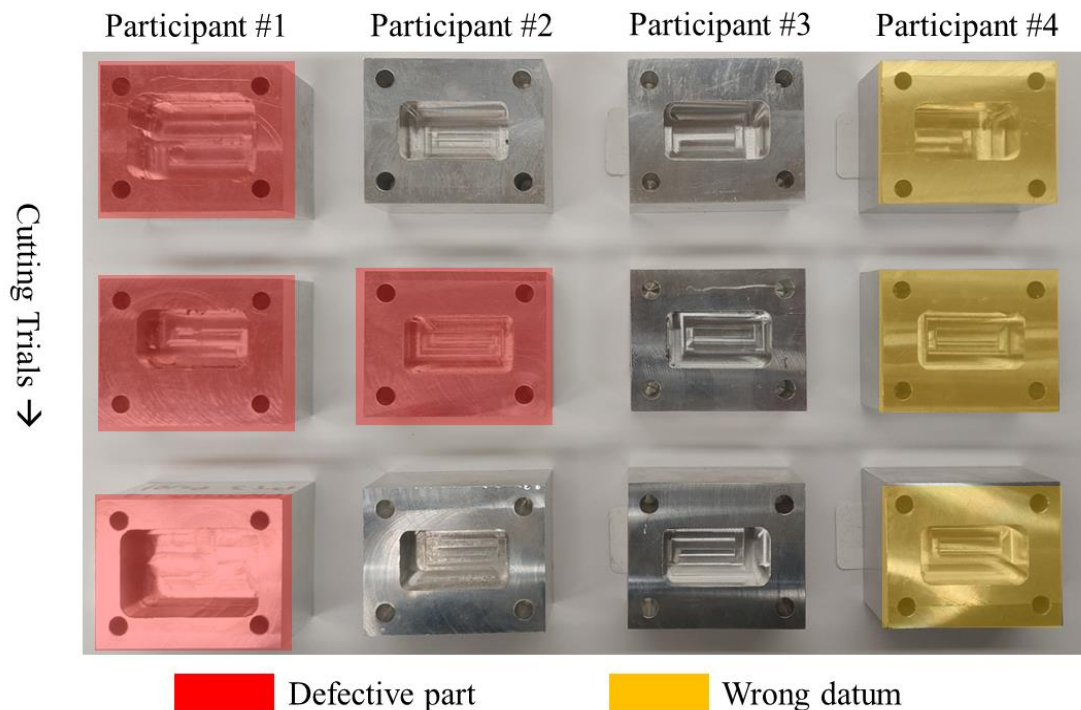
Final parts fabricated by trainees in individual cutting trials.
